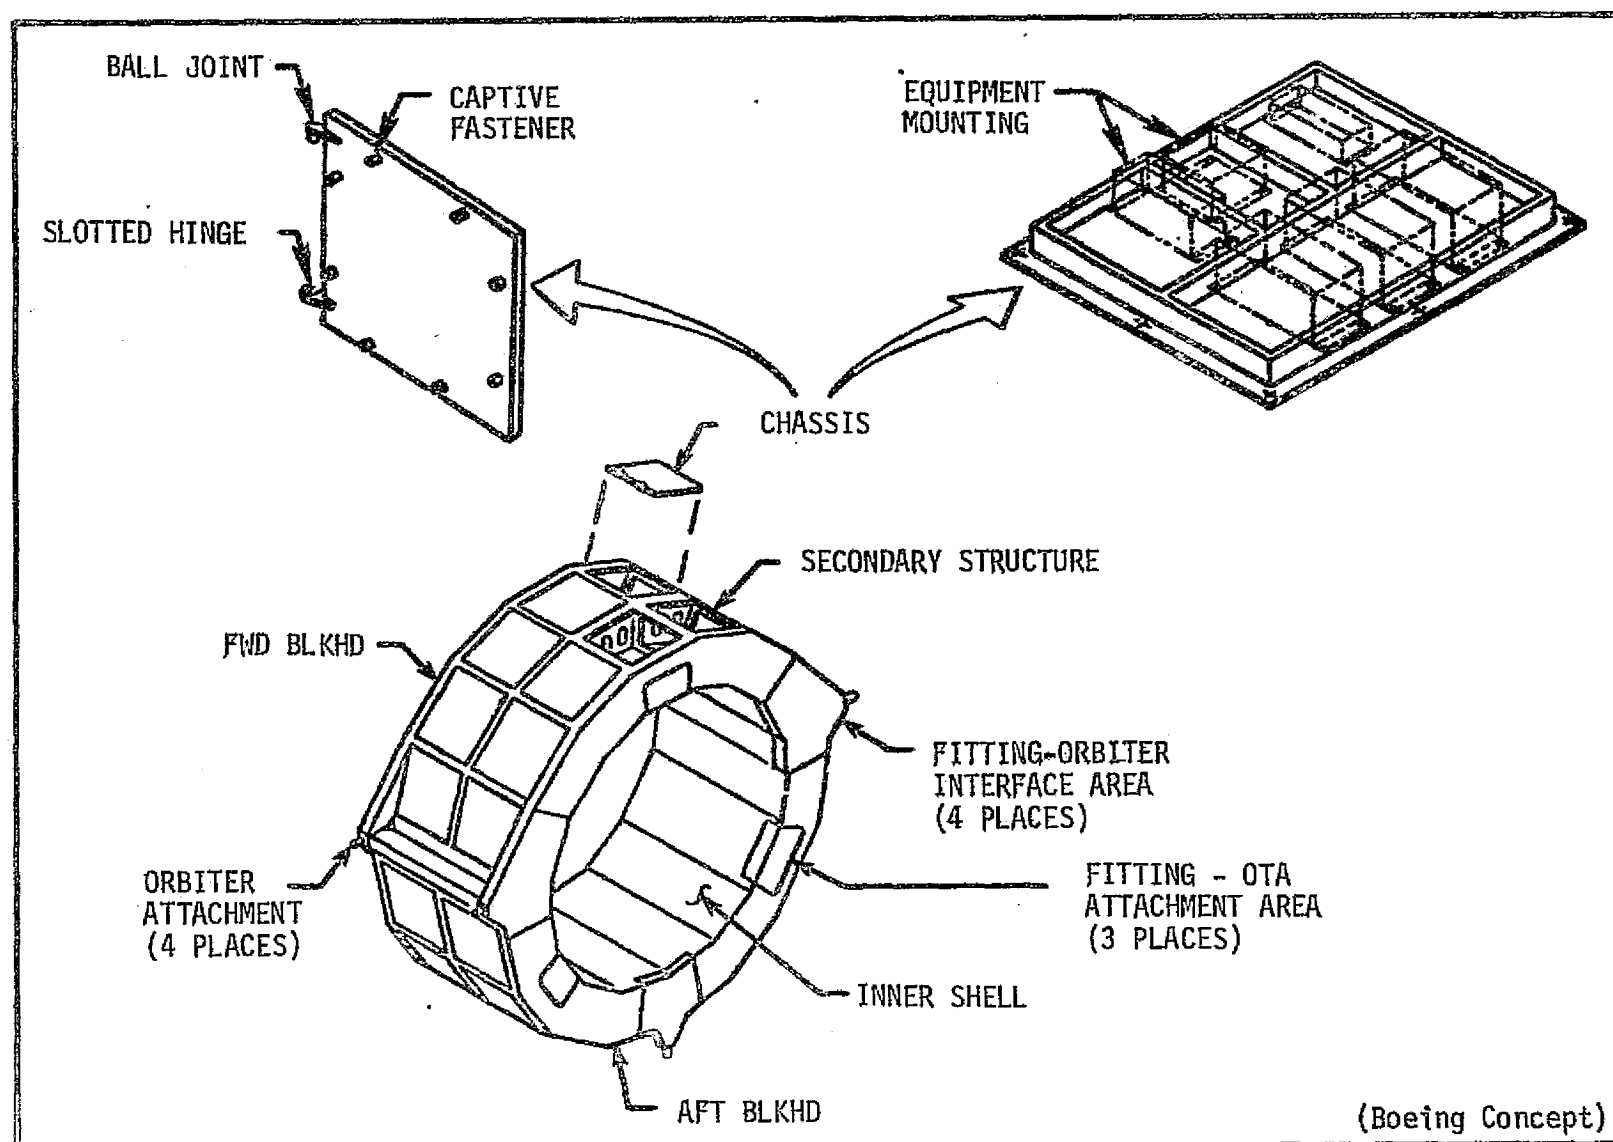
LST/SSM Equipment Section Structure Characteristics
